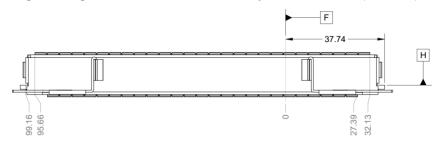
Large Form Factor OCP NIC 3.0 Card with Ejector CTF Dimensions (Front View)
